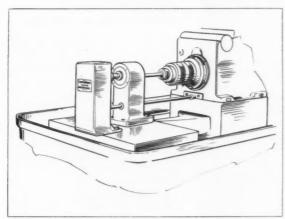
Automatic sizing unit available as optional equipment for machine shown in Fig. 1.
